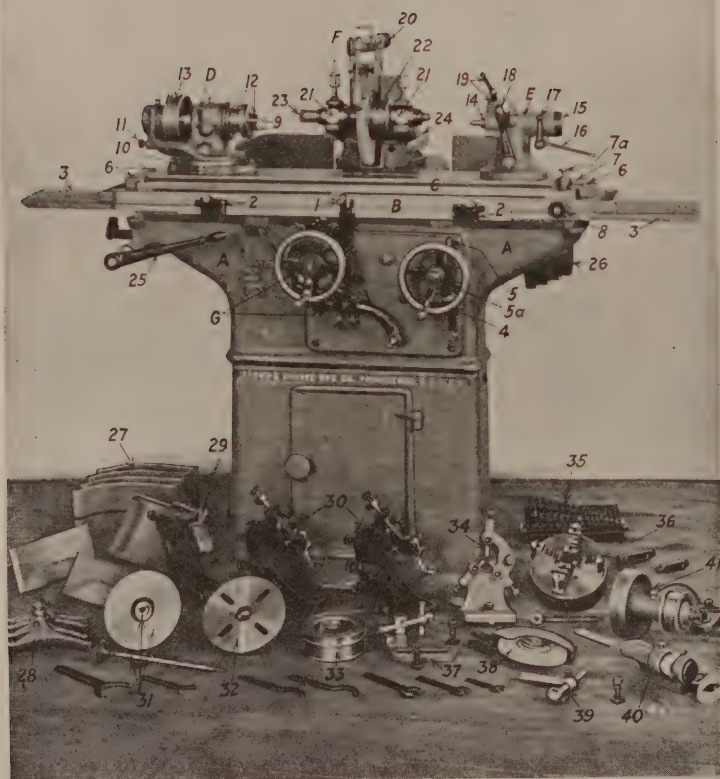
Brown & Sharpe universal grinding machine and accessories.
